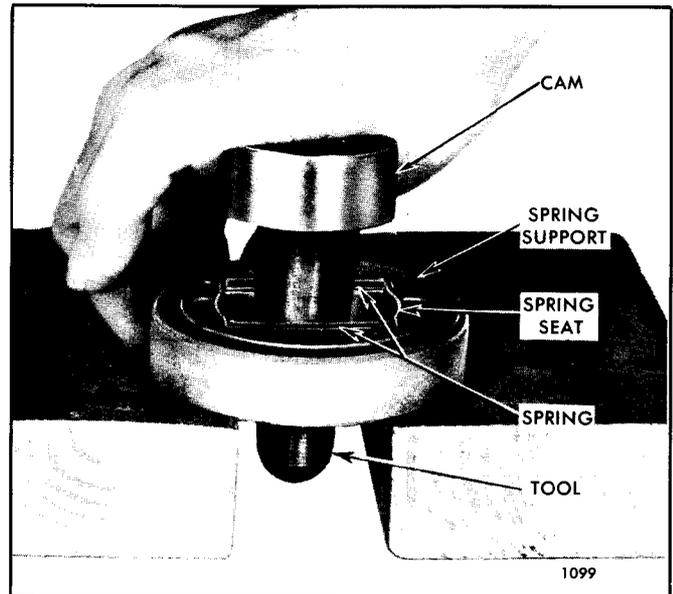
Inserting Cam in Blower Drive Support with Tool J 5209
